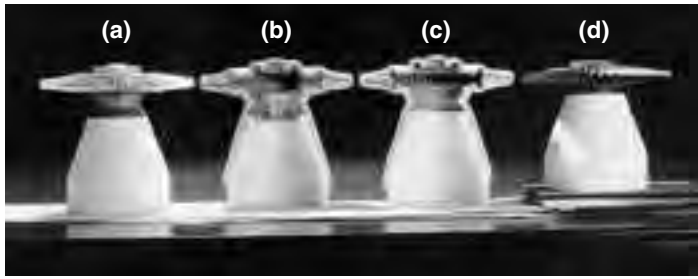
Investment casting of an integrally cast rotor for a gas turbine. (a) Wax pattern assembly. (b) Ceramic shell around wax pattern. (c) Wax is melted out and the mold is filled, under a vacuum, with molten superalloy. (d) The cast rotor, produced to net or near-net shape. *Source:* Courtesy of Howmet Corporation.
